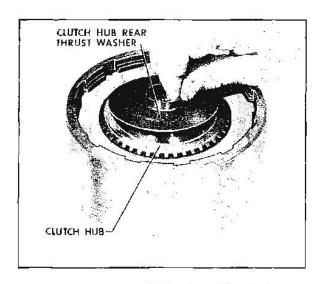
B-71 Removing Clutch Hub Rear Thrust Washer
